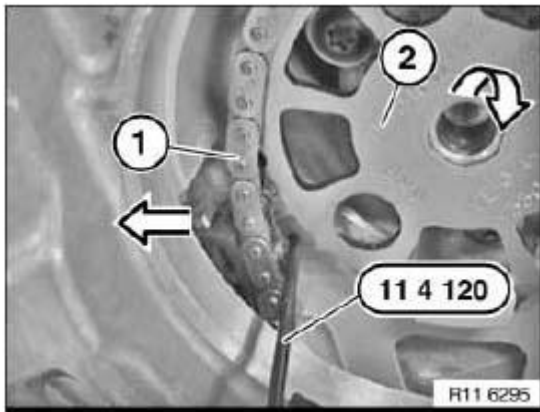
Identifying Special Tool (11 4 120), Chain Tensioner And Sprocket Wheel
